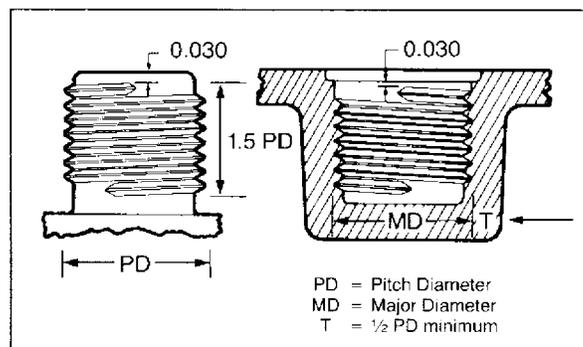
Recommended design for molded-in threads, Calibre polycarbonate.
